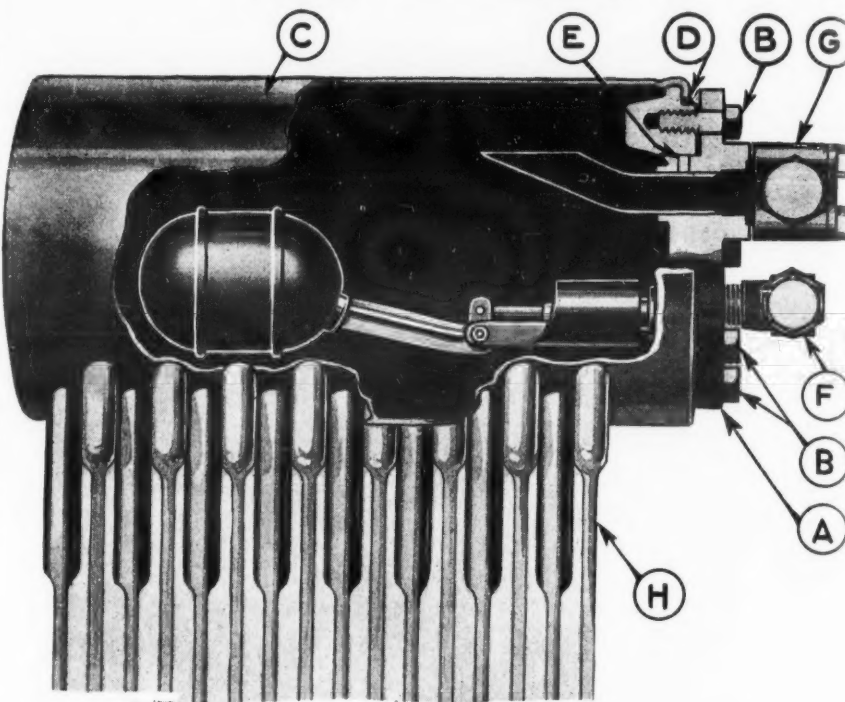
Cooling coil cutaway to show various parts. "A" is the float valve assembly clamped in the boiler "C" by the use of cap screws "B." A tight seal is formed by a lead gasket at "E." The tubes at "H" contain refrigerant as well as the boiler proper. The boiler is silver soldered to the header at "D."
